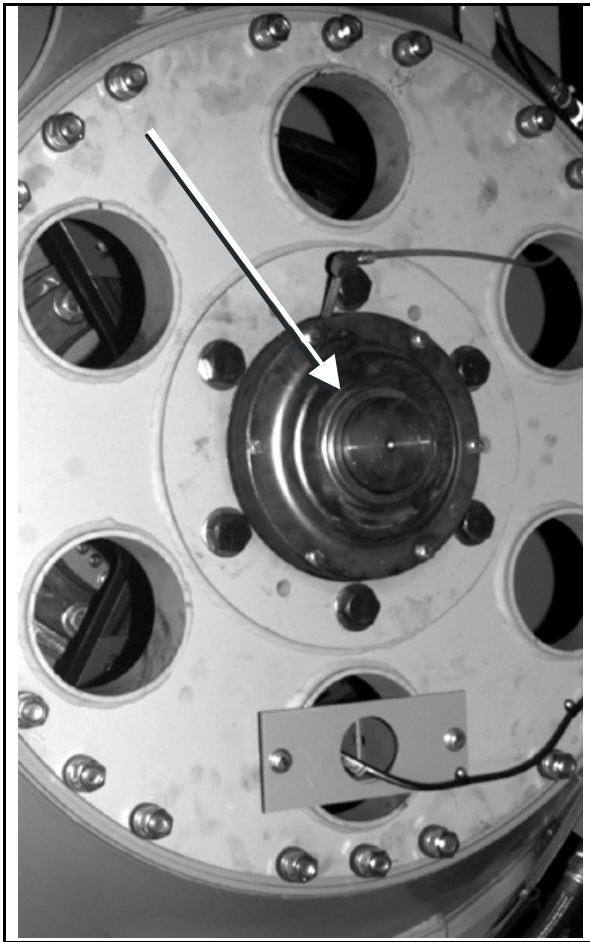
Shim Motor Platform to Plumb Motor Pulley
